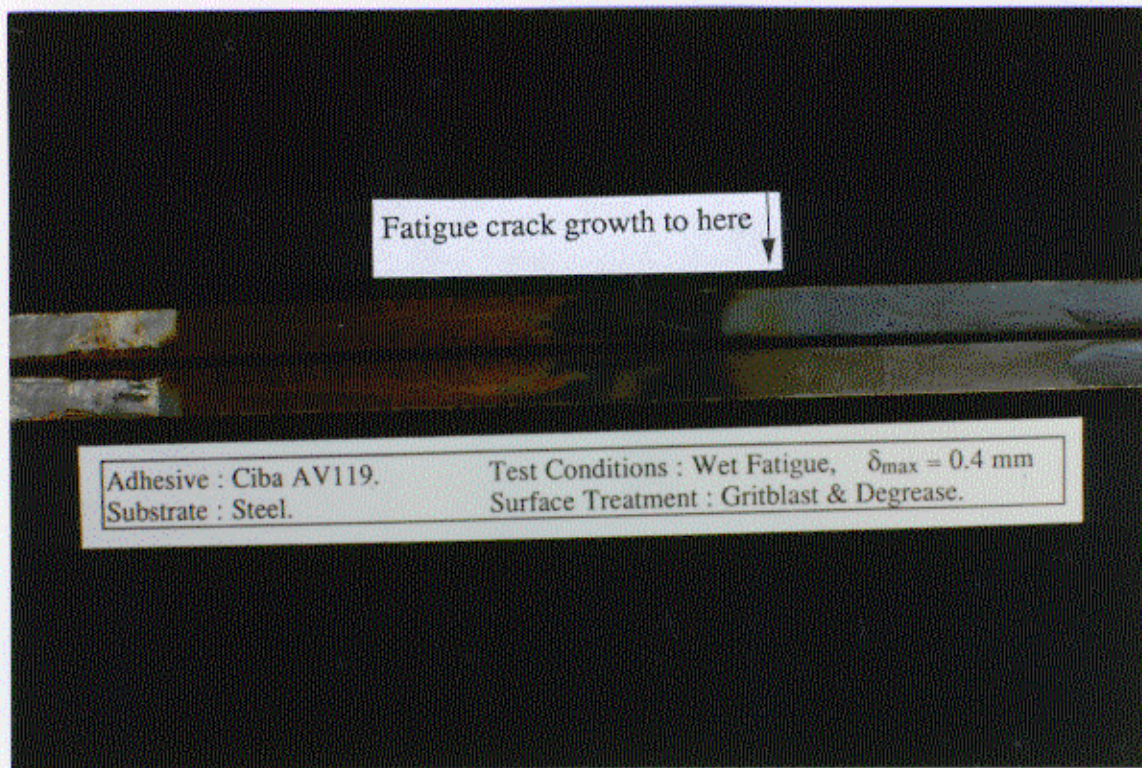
Fracture surface of 'wet' steel specimen bonded with 'AV119' showing apparently interfacial failure and corrosion of exposed oxide on both fracture surfaces.
